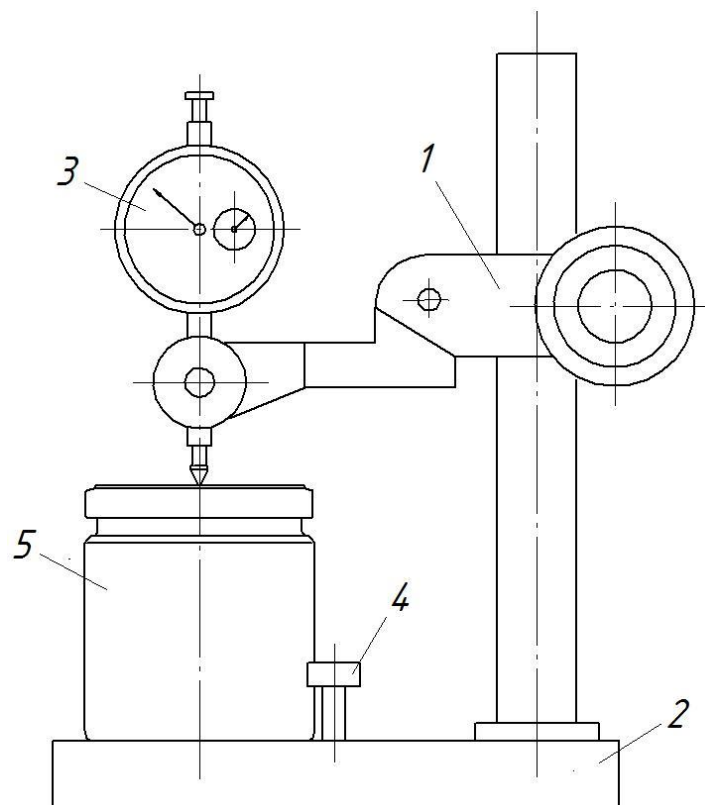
Indicator device. 1 – tripod; 2 - control plate; 3 - dial gauge; 4 - locking stops; 5 – tested sample.
